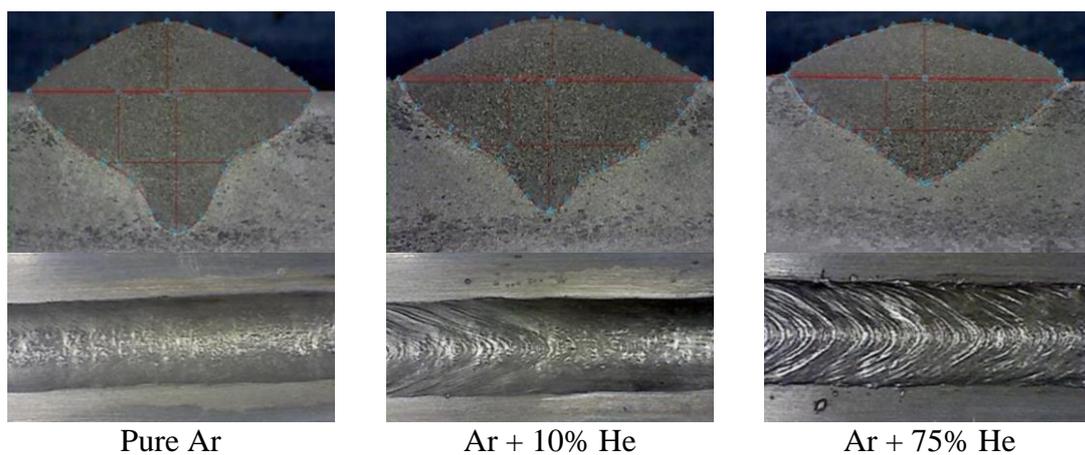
GMAW welding of 6 mm thick aluminium with 4043 filler (Miller, n.d.).
